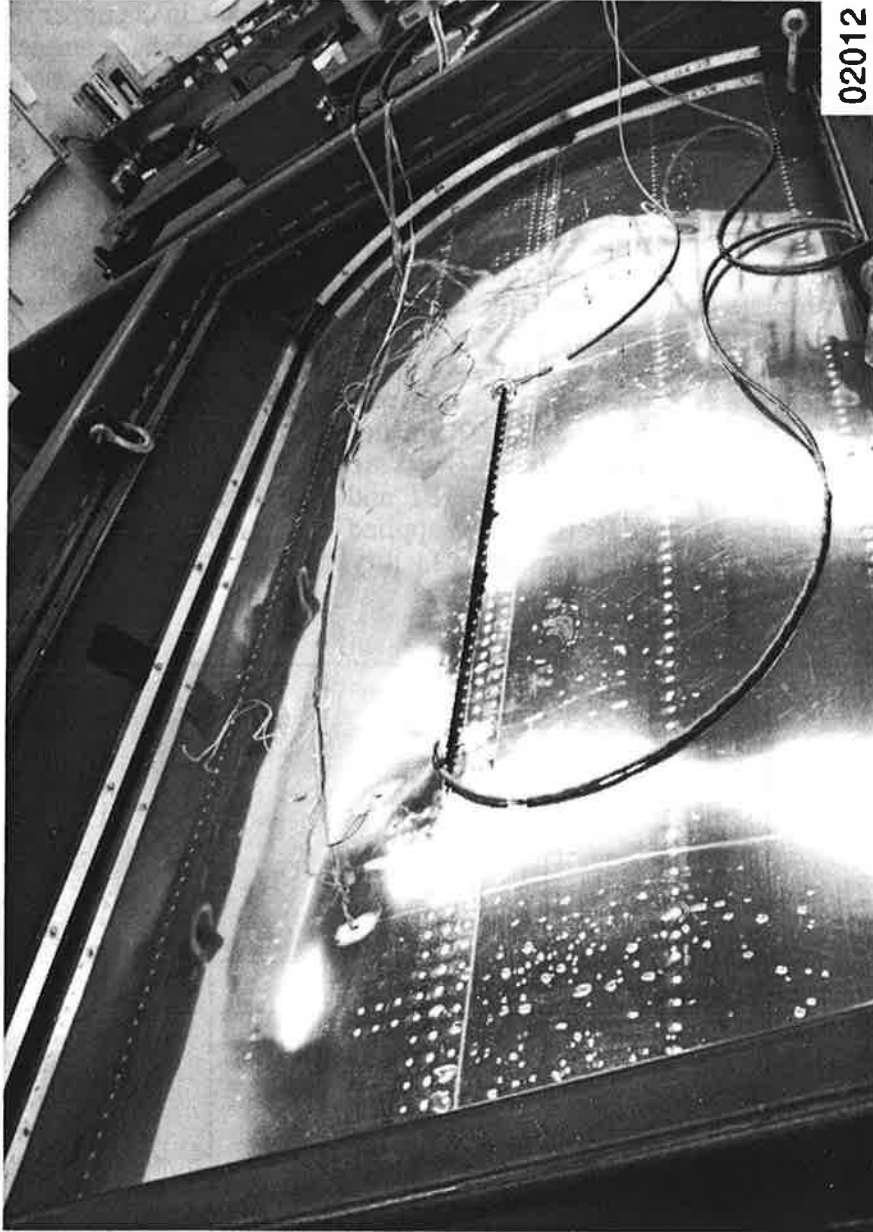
Panel 10: 29.36 in. Crack, No MSD - After Fracture
